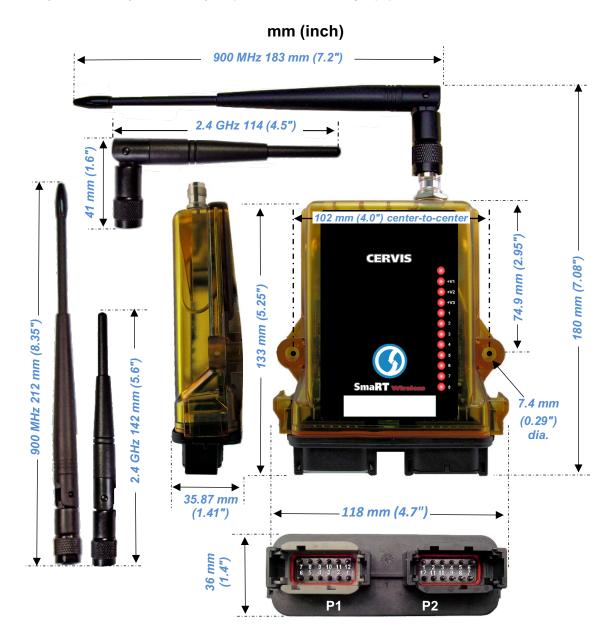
SmaRT BU-xH16AF-EXT Mounting Dimensions
